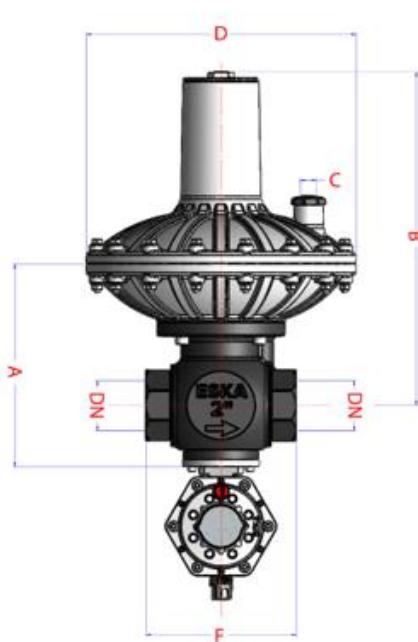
ERG HZ6 (Threaded) Technical Dimensions
